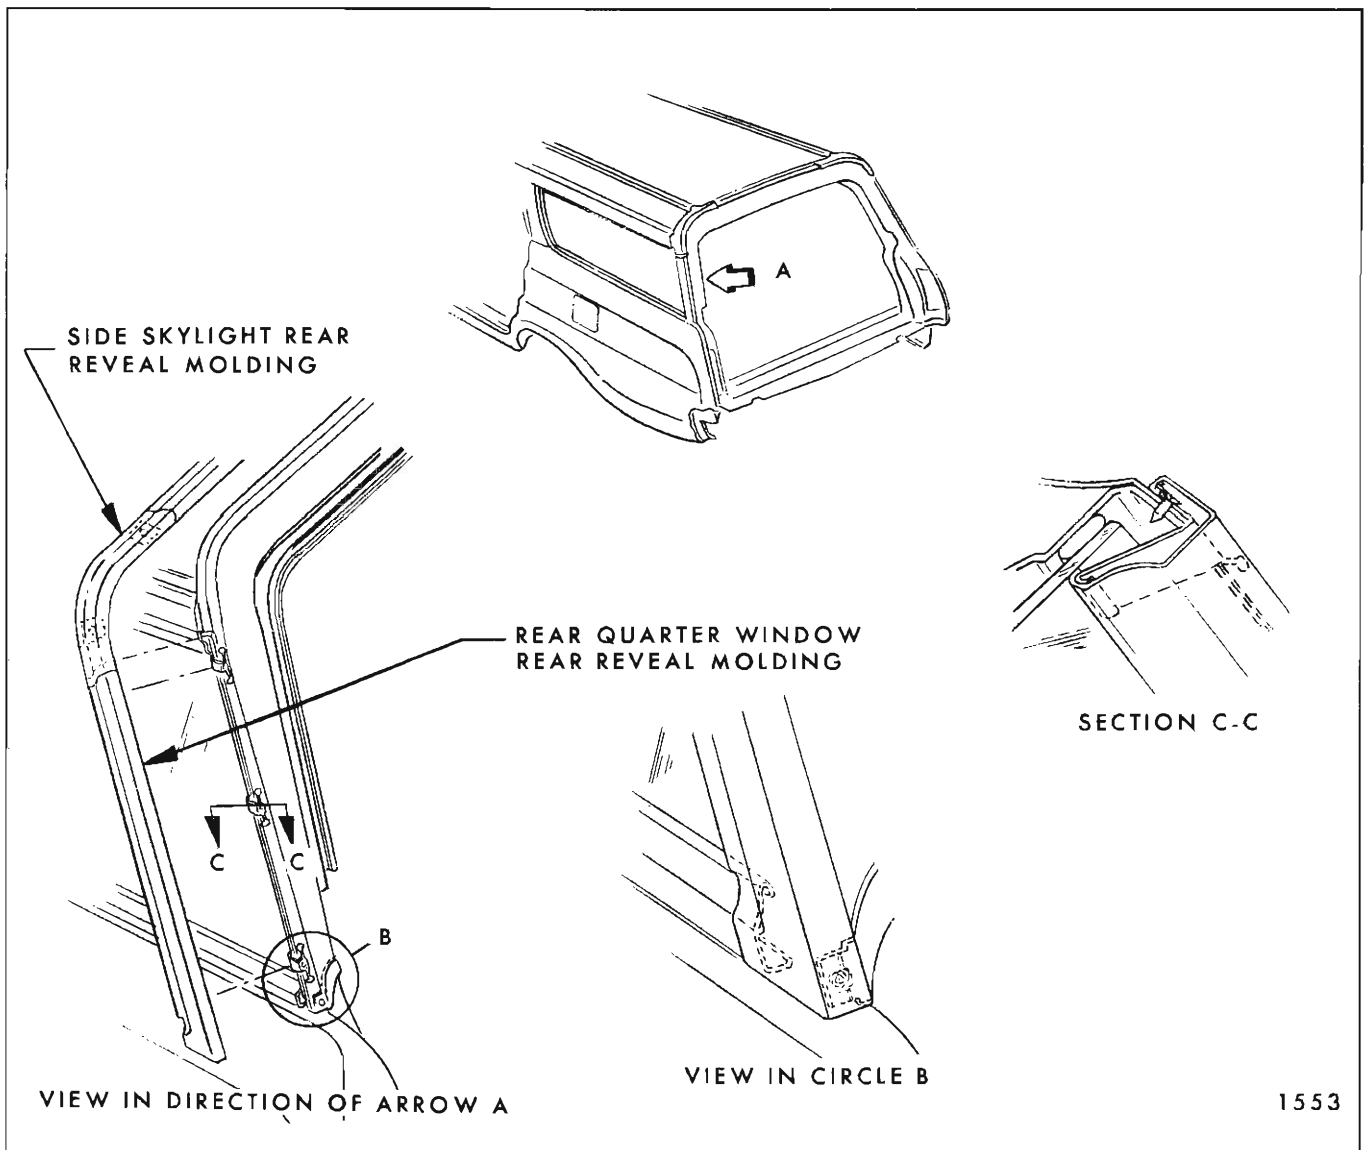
E23—Rear Quarter Window Rear Reveal Moulding
